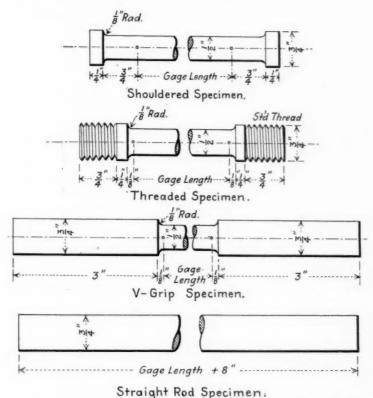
Forms of Test Specimens Used in Sub-Committee's Tests.
